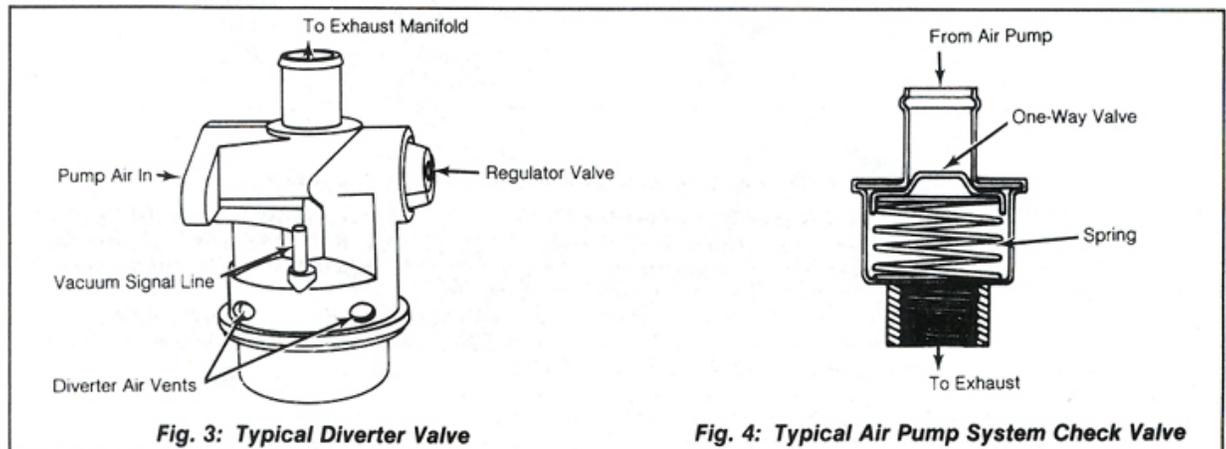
Typical Diverter Valve & Air Pump System Check Valve
